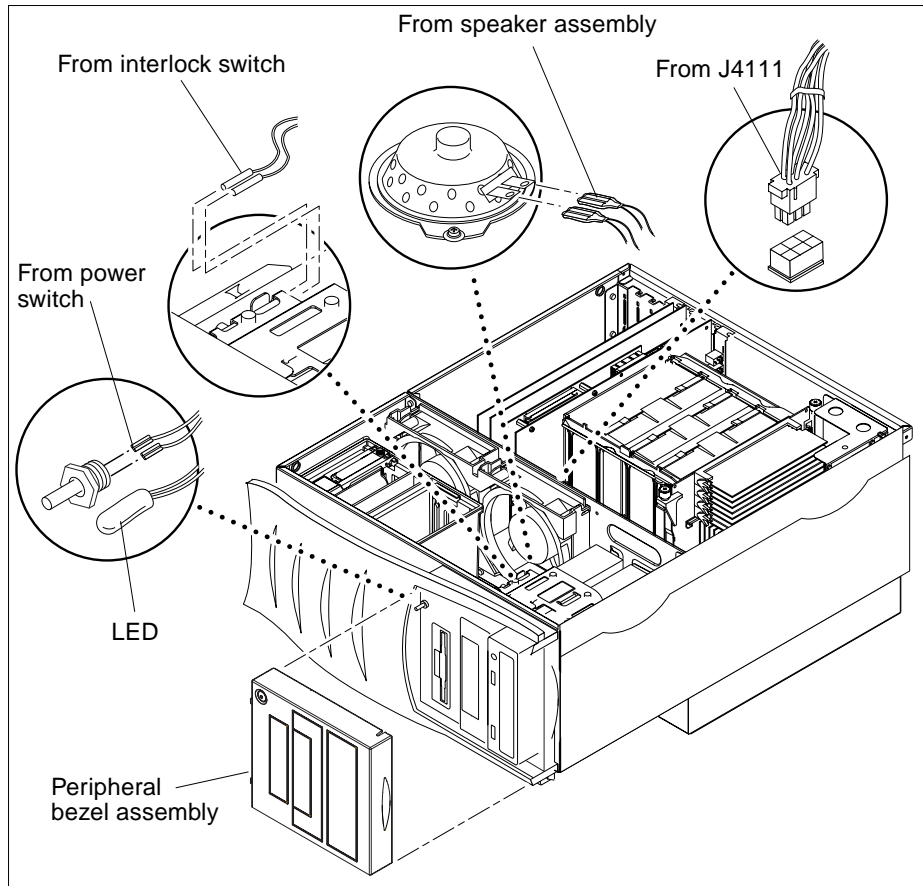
Removing and Replacing the Combined Cable Assembly
